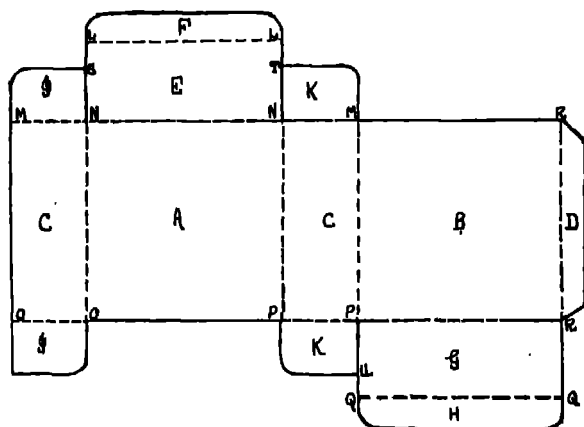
SINGLE-PIECE DESIGN FOR CIRCULAR DENTIFRICE TABLET CONTAINER.
